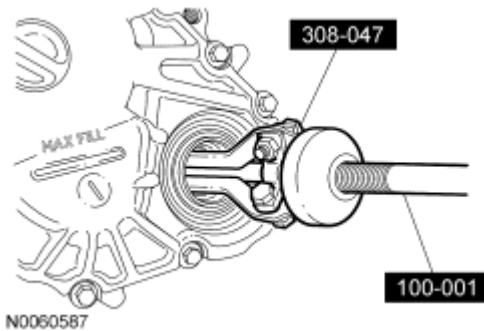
Removing Intermediate Shaft Seal Using Special Tools (100-001) & (308-047)
